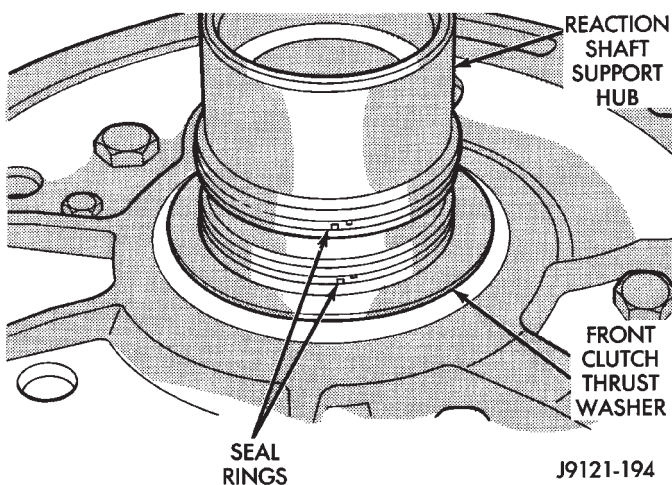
Reaction Shaft Support Seal Rings And Front Clutch Thrust Washer Position
